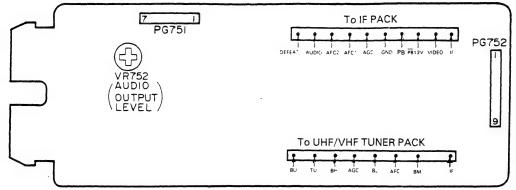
Tuner/IF P.C. Board (Parts Side)
